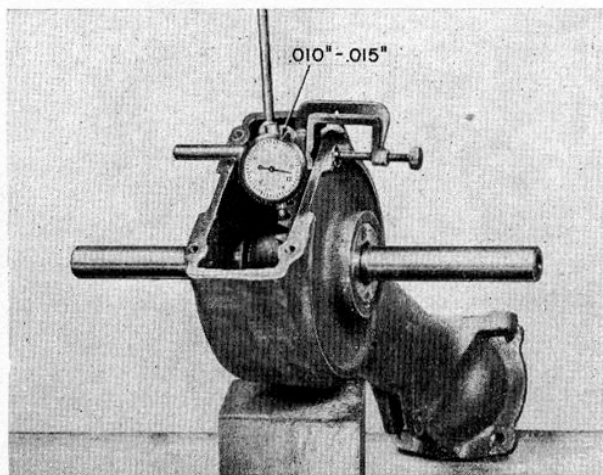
MEASURING BACKLASH BETWEEN PINION AND RING GEAR
